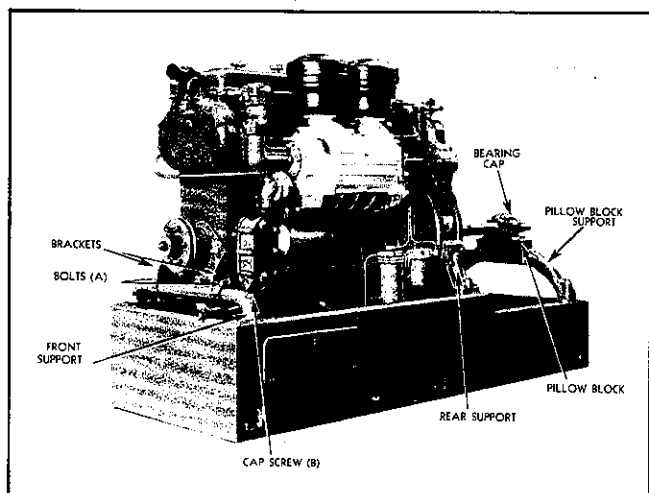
Rigid Engine Mountings—Used with Power Take-off Units.
